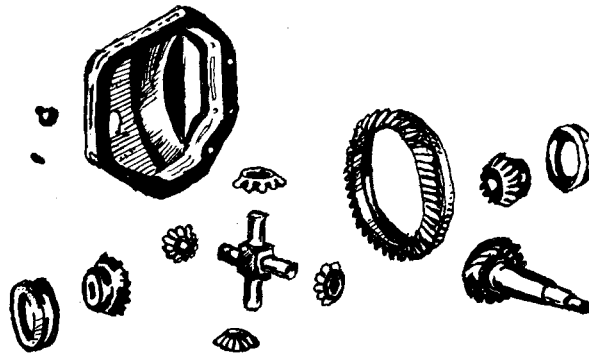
Exploded view of differential, showing four pinion ("spider") gears.
